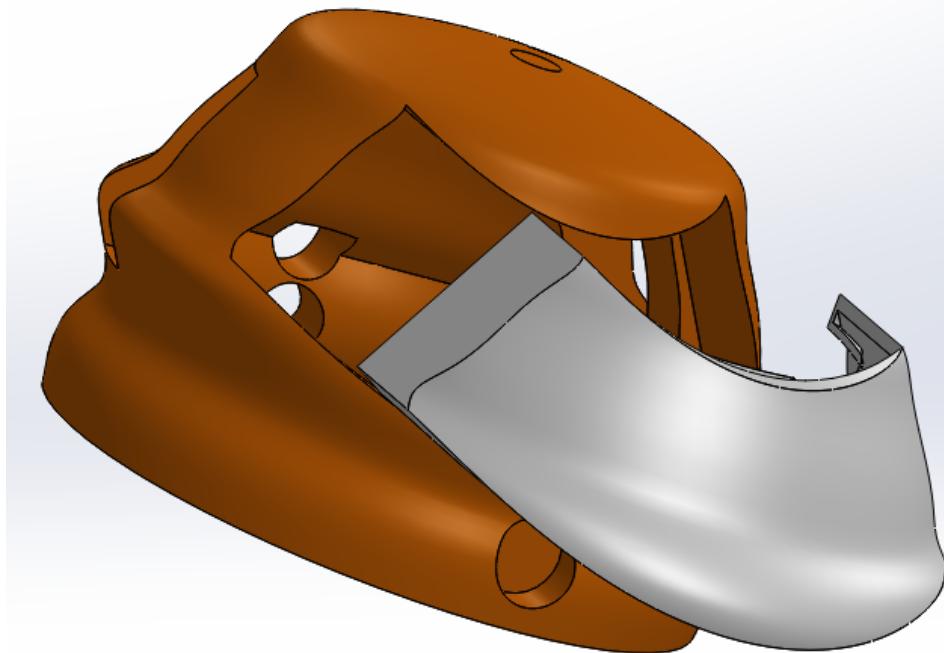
Ferrarer, Auston: Assembly Step 1
